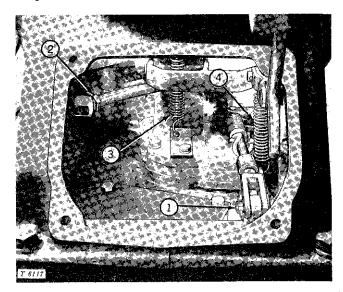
Disconnecting Oil Pump Line and Linkage (H-L-R)
